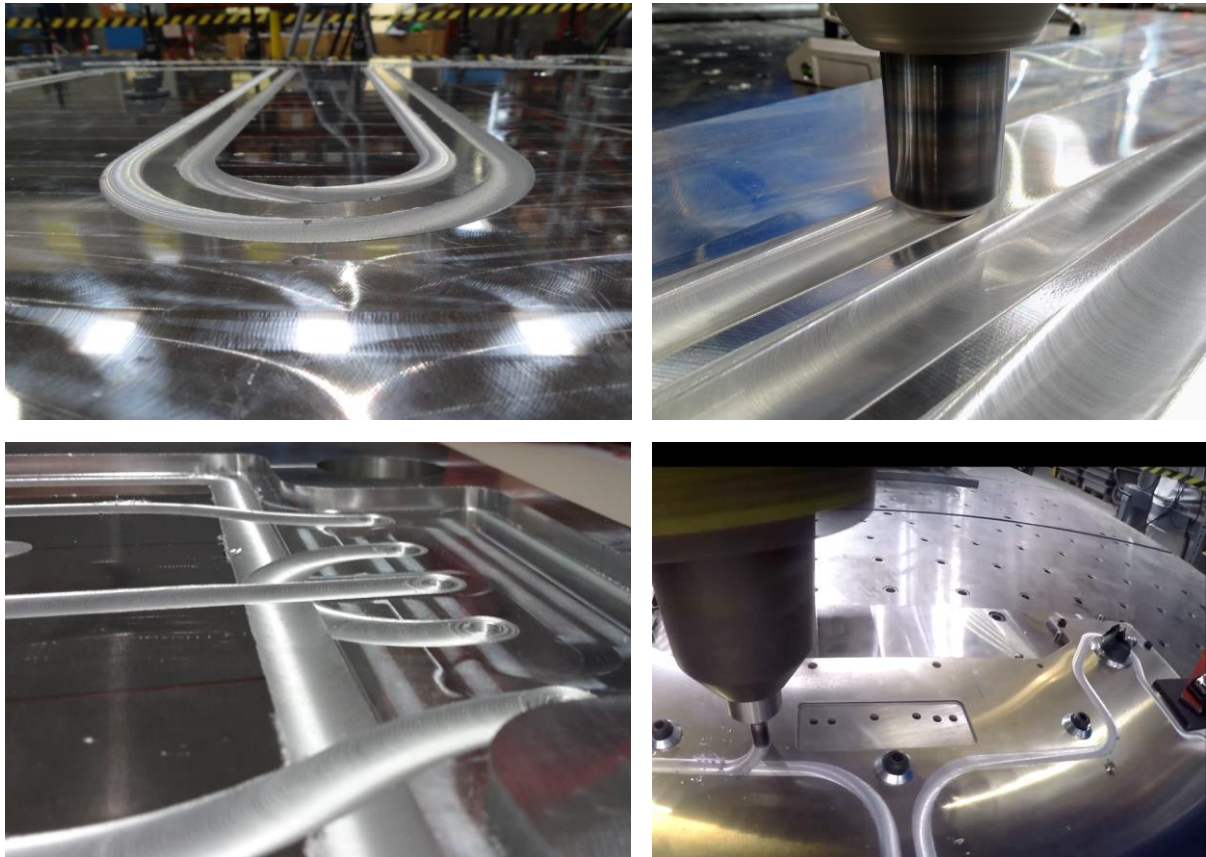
Typical FSW applications – welds laying in the same horizontal welding plane, all pictures: courtesy of Rapid Technic Switzerland
